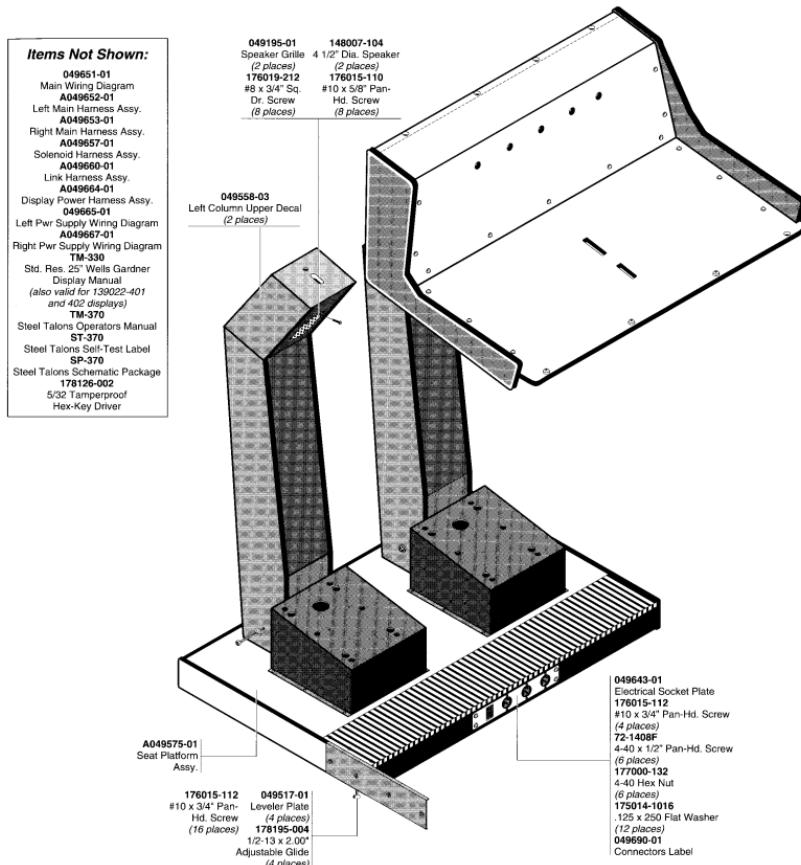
Cabinet-Mounted Assemblies, Rear View
